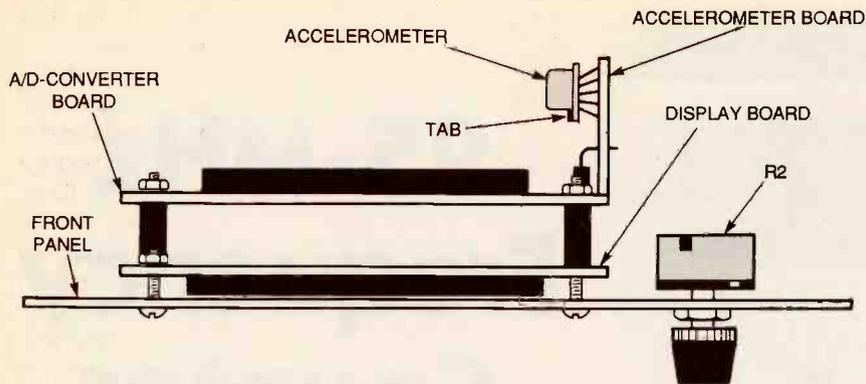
This is a top-side view of the "g" Machine. Make sure U2 is placed so that its tab points towards the front panel, as shown. The boards are mounted with spacers and machine screws and nuts.
